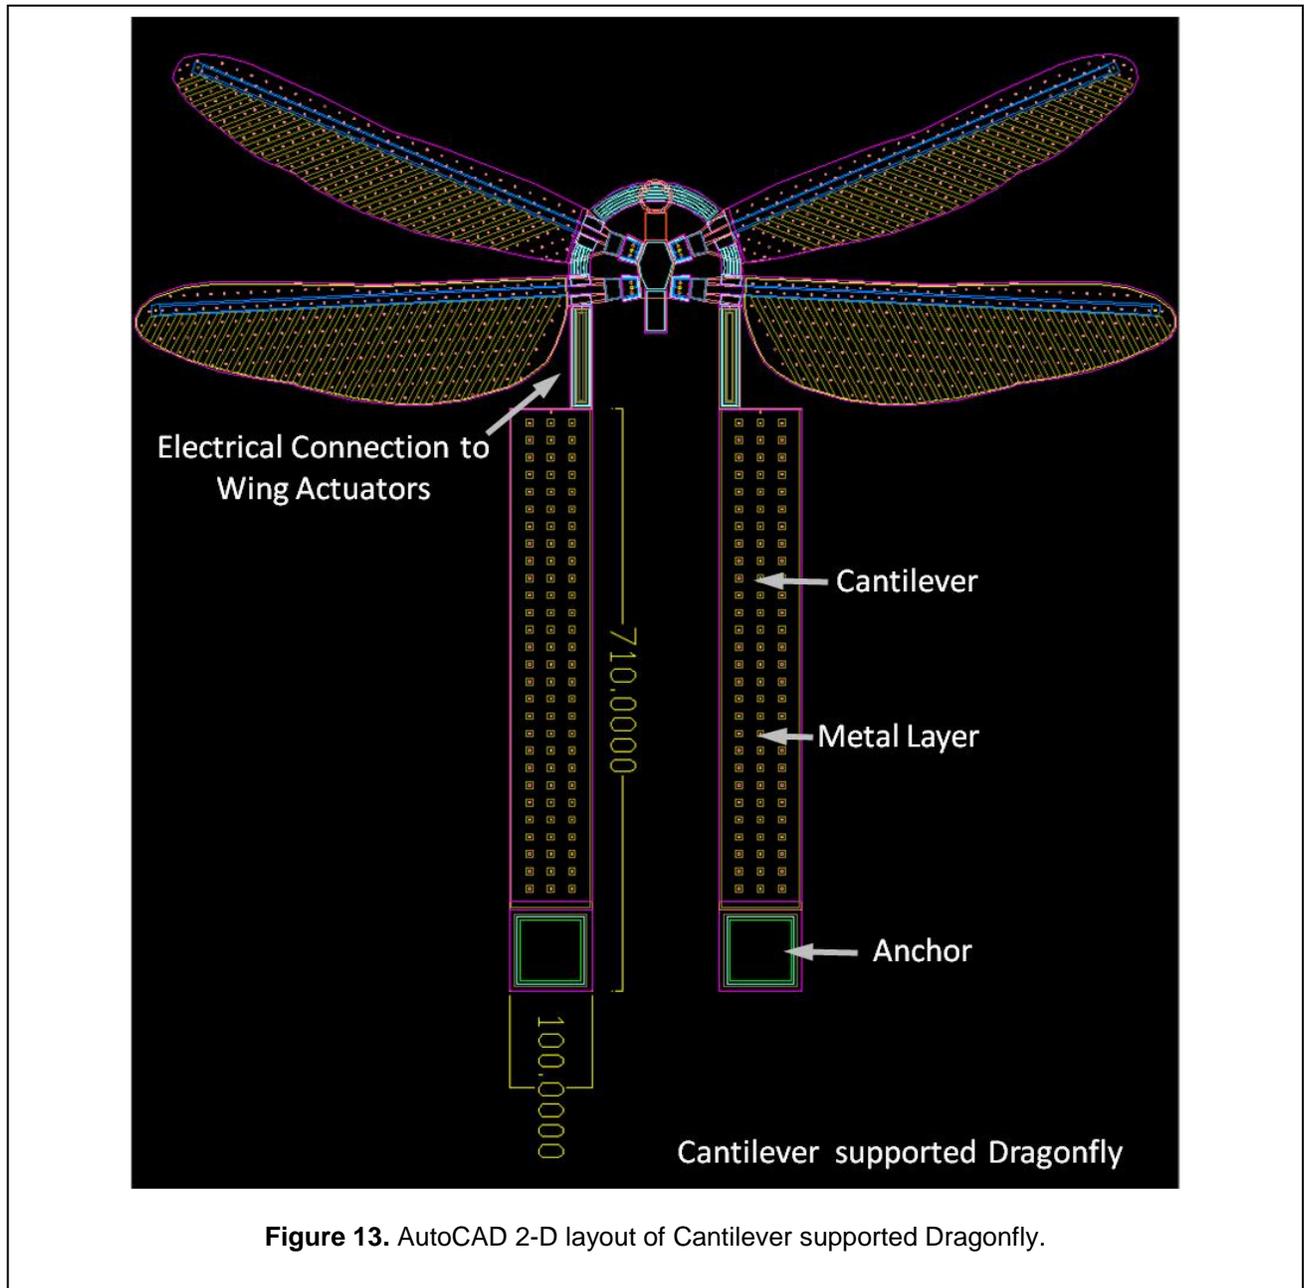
AutoCAD 2-D layout of Cantilever supported Dragonfly.
